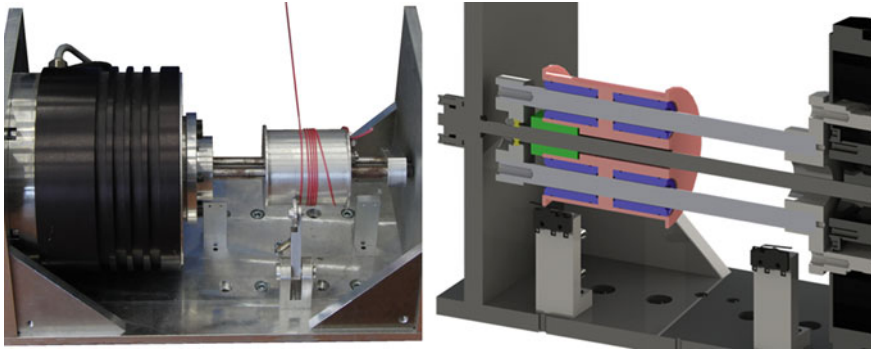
Views of the first version of the winches. *Right* is a cut CAD view, with the drum part in *red*, the cylindrical bearings in *blue*, the screw nut in *green* and other turning parts in *grey
